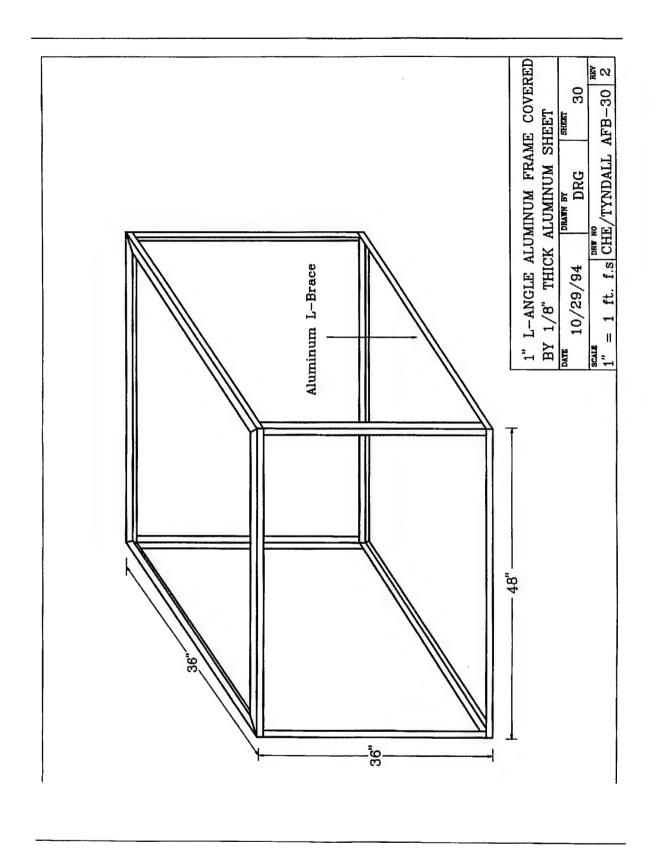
L-Angle Aluminum Frame Covered by 1/8" Thick Aluminum Sheet
